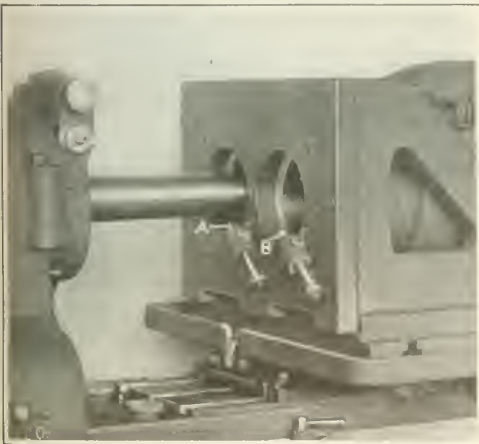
Devices for truing Grinding Wheel on Heald Cylinder Grinding Machine
